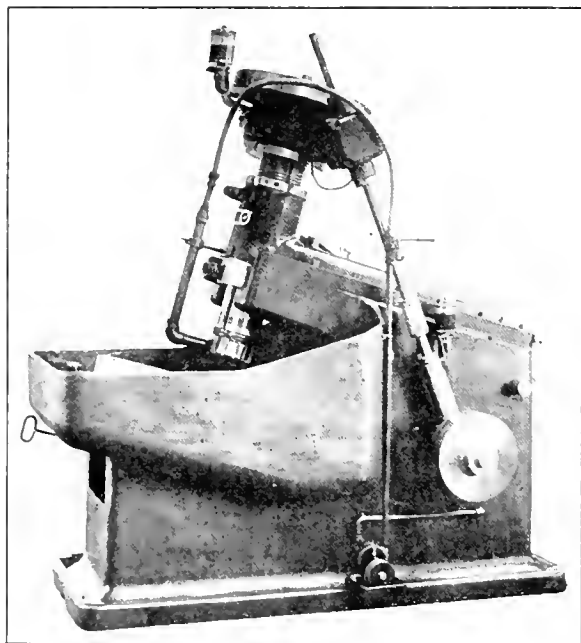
SPINDLE-DRIVE MECHANISM IN THE OESTERLEIN CONTINUOUS MILLER
